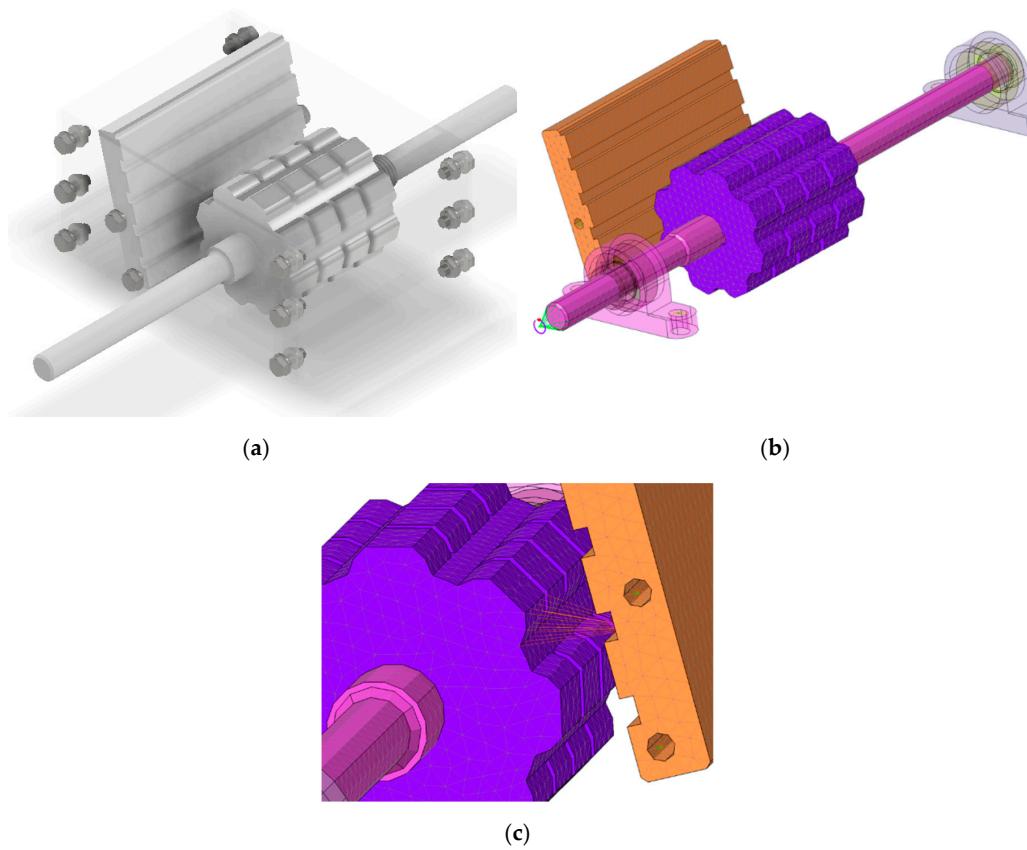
(a) Fracture mechanism for Metohuayo fruits; (b) mesh of fracture mechanism; (c) detailed mesh of the toothed wheel and toothed wall.
